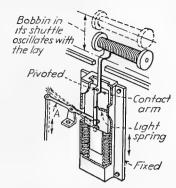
Schematic diagram of mechanism to cause bobbin changer to operate. If the contact arm does not slip on the bobbin, the lever A will rotate to the position shown. But if contact with the bobbin center slips, as it will do if the bobbin is empty, lever A will not rotate to the position indicated by the dashed line, thereby causing the bobbin changer to come into action.
